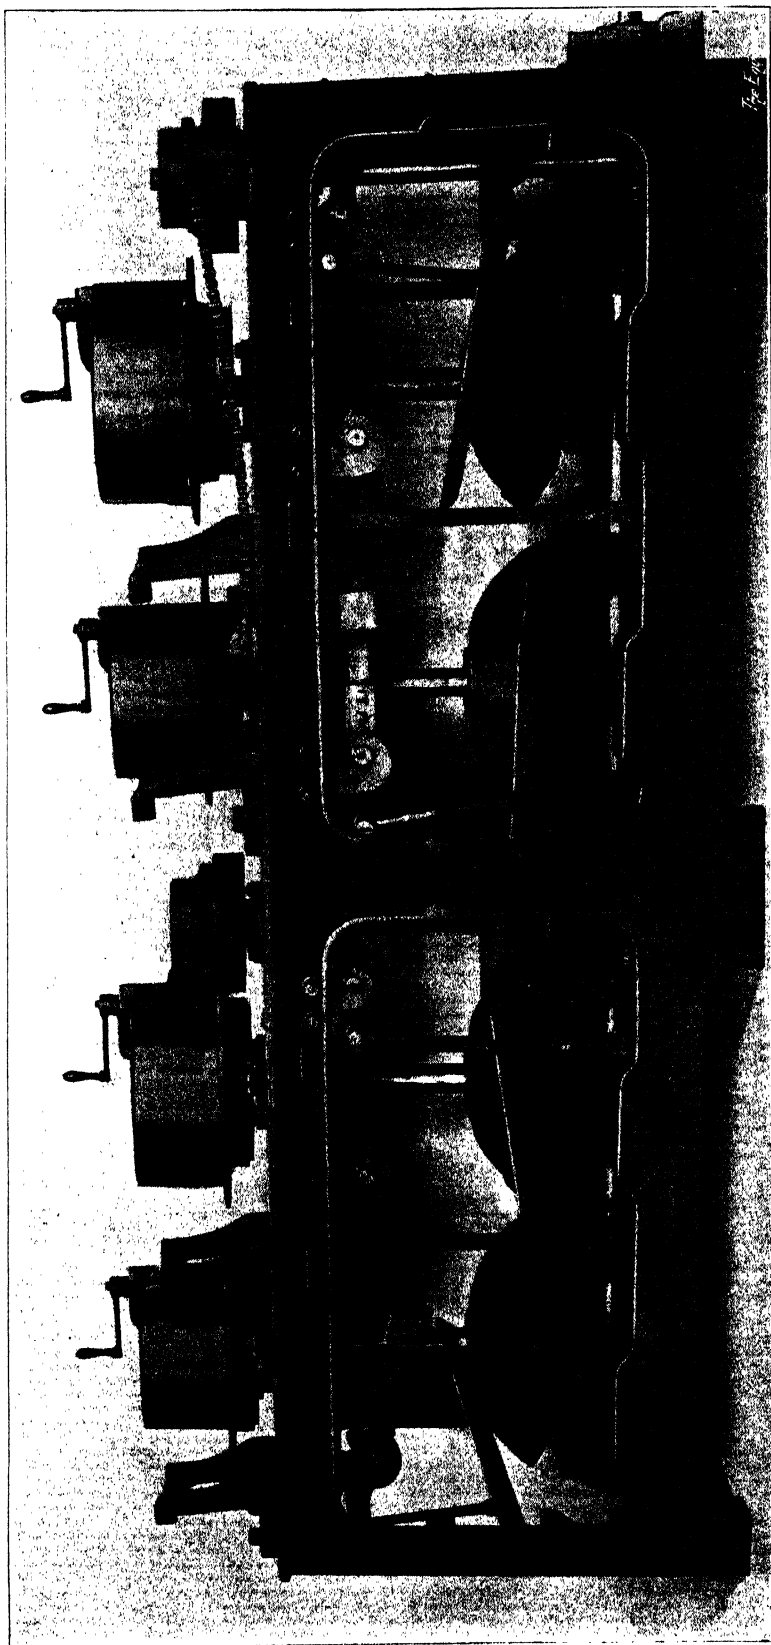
18 IN. DIAMETER TWO-HOLE CONTINUOUS WIRE-DRAWING MACHINE—G. CROSSLEY.
